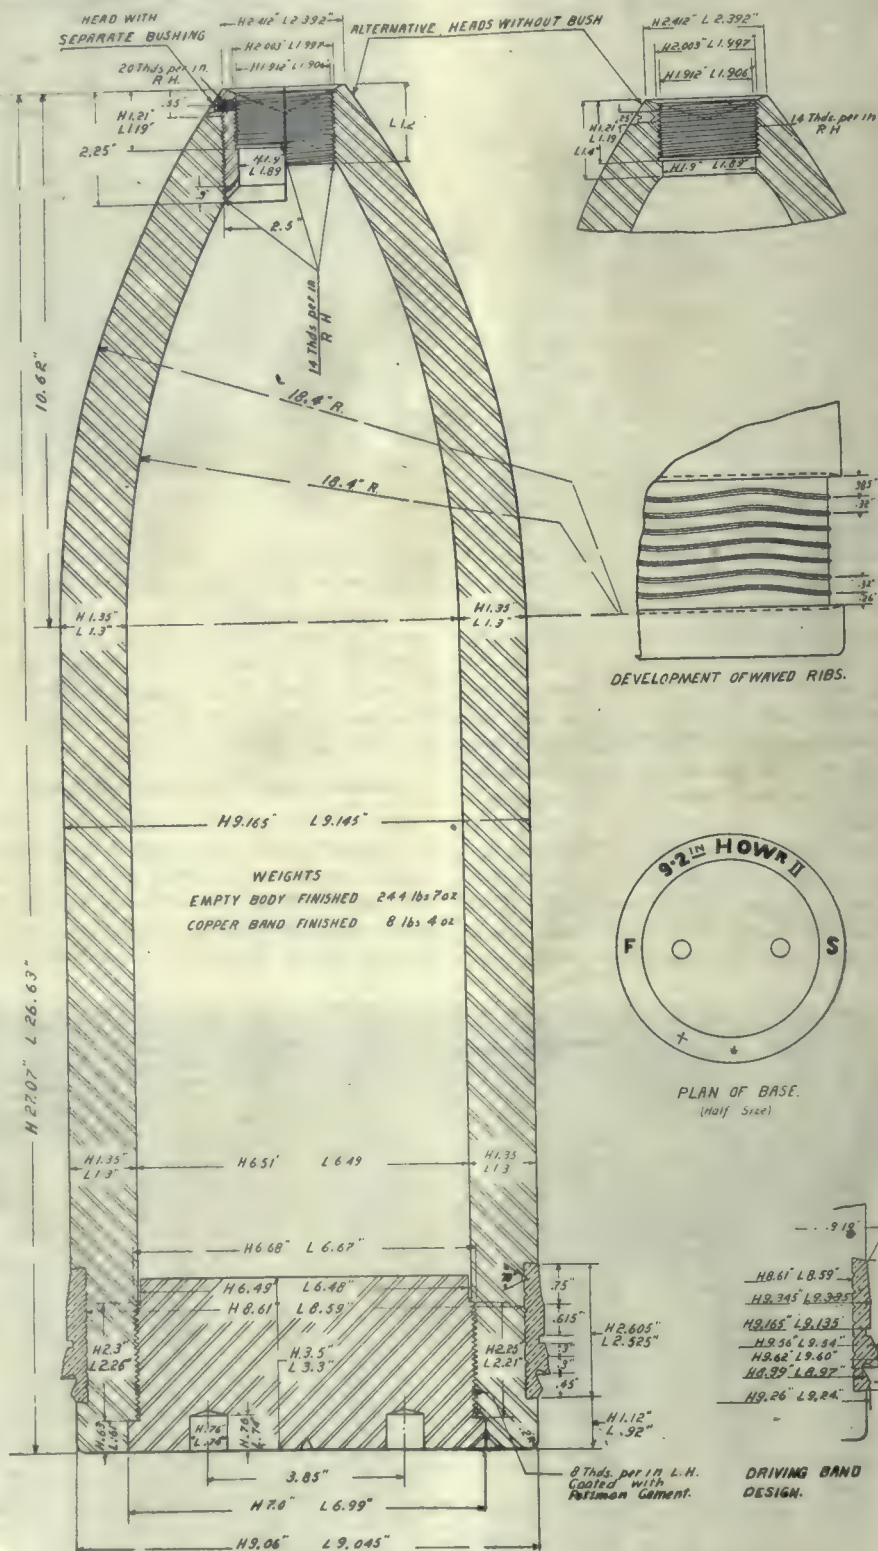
TYPICAL 9.2 IN. MACHINED HIGH EXPLOSIVE SHELL
